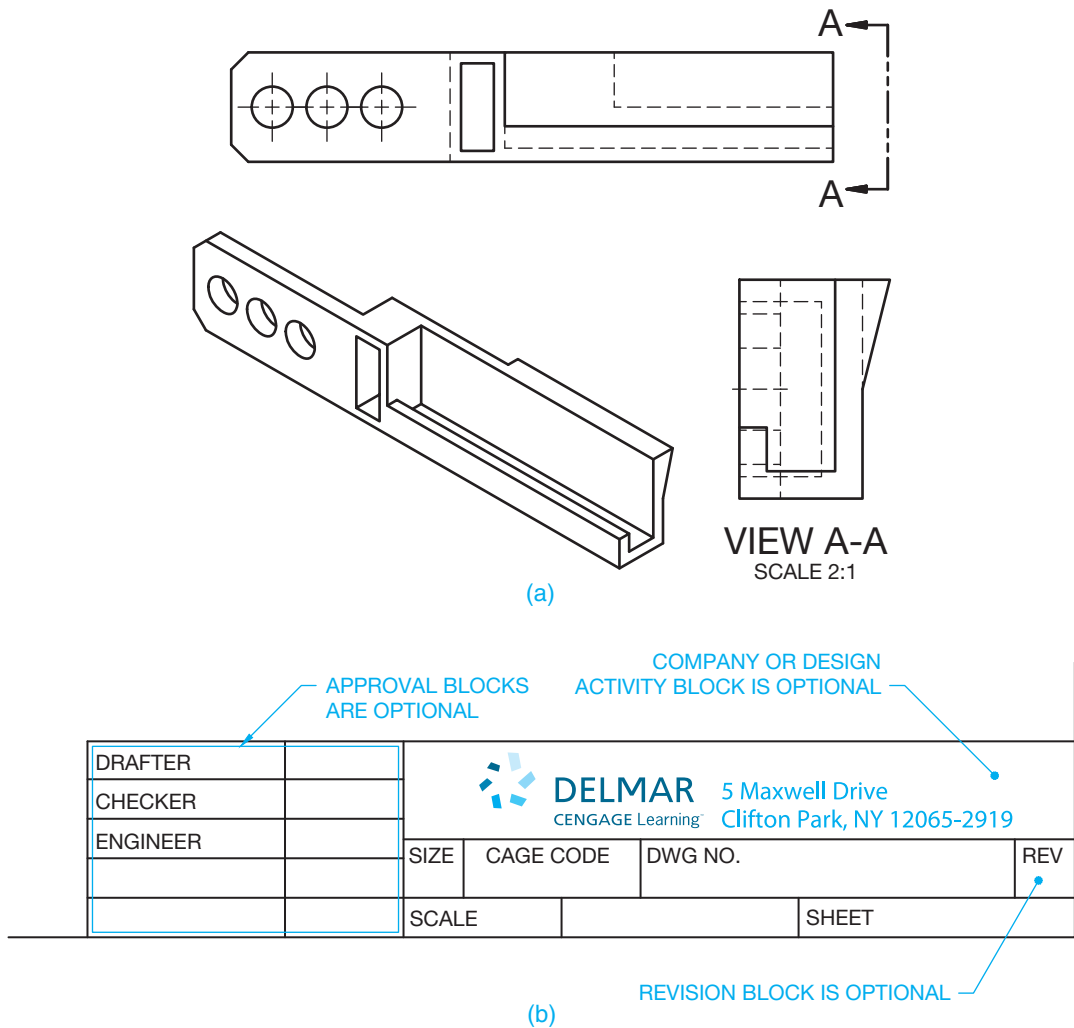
(a) A removed view. (b) The optional continuation title block used after the first sheet when a drawing occupies more than one sheet.
